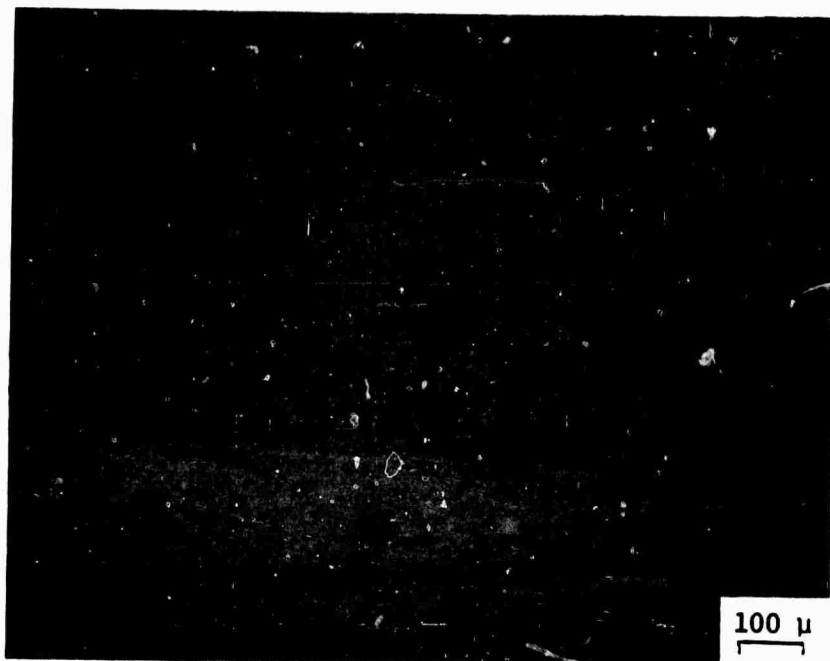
Fracture surface profile and two types of inclusions in aged Maraging 300-HIP alloy from 1st bar.
